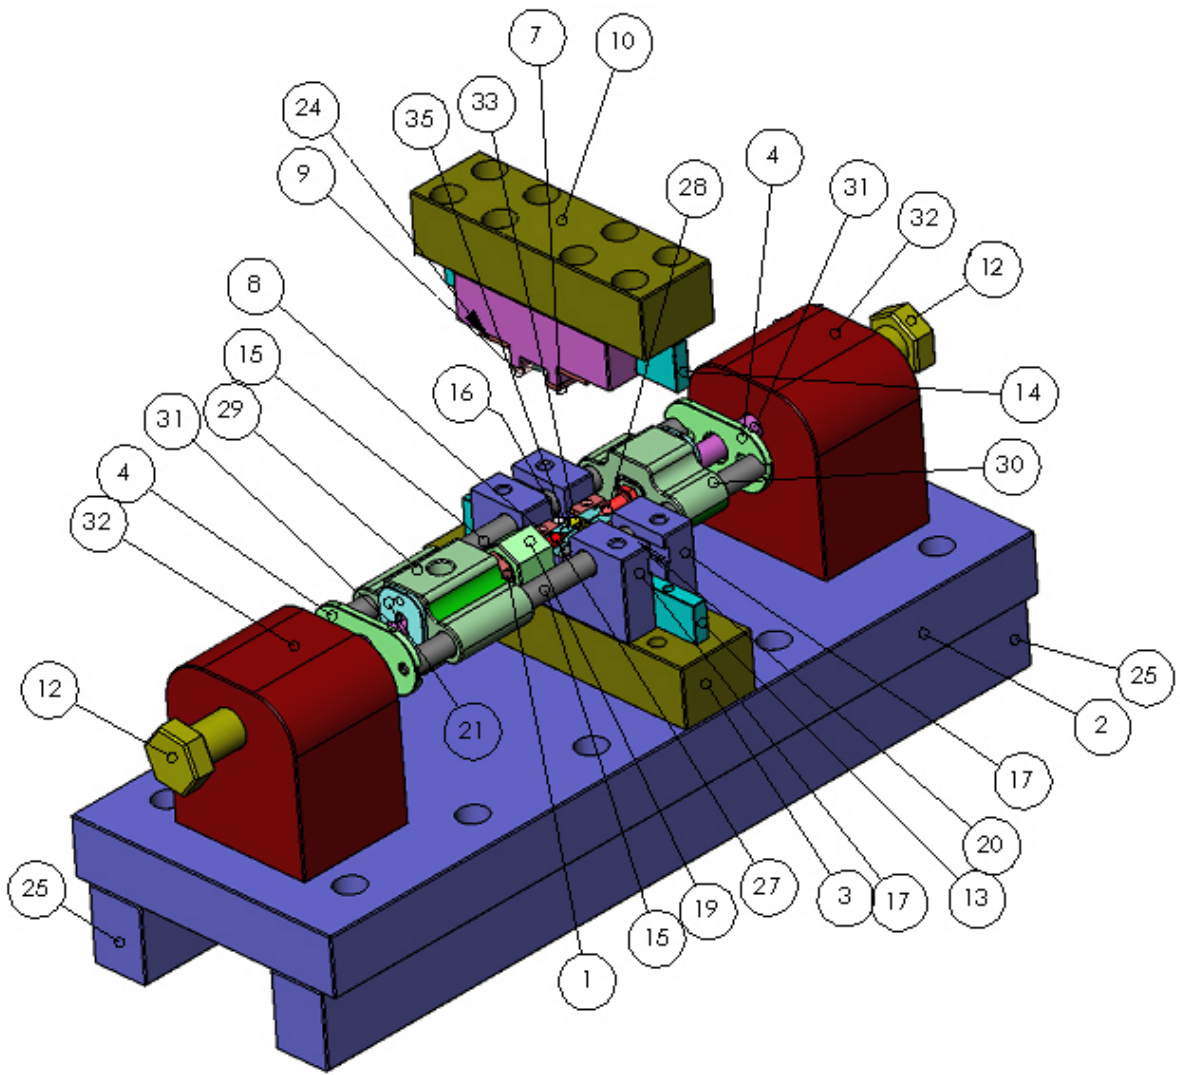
Assembly of tool unit with both top and bottom tool blocks and parts list
